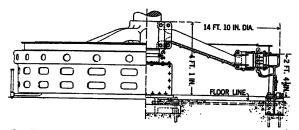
Cross-Section, Synchronous Motor for Polishing Machine
